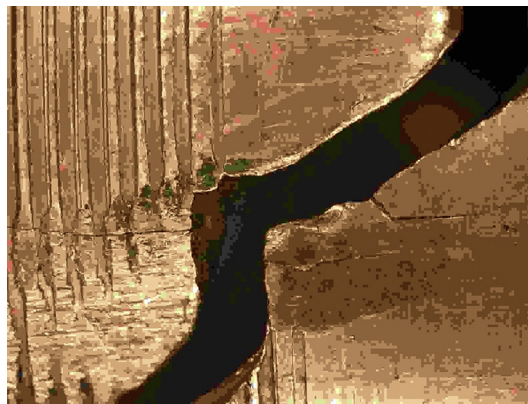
Longitudinal corrosion fatigue cracks in preexisting notches of copper tubes in a subcooler [54]. <http://www.corrosionlab.com/Failure-Analysis-Studies/30038.corrosion-fatigue-cu-tube.htm>. Photo provided courtesy of Corrosion Testing Laboratories, Inc., Newark, DE.
